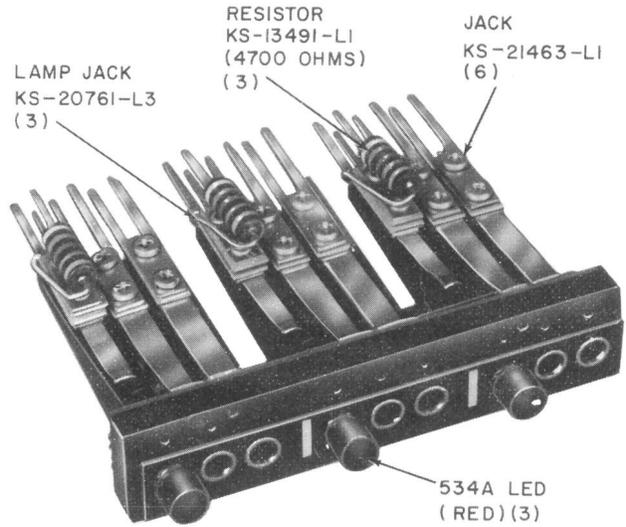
A—KS-21315 L6 Monitoring Insert Assembly Containing Three Fully Equipped Channels
